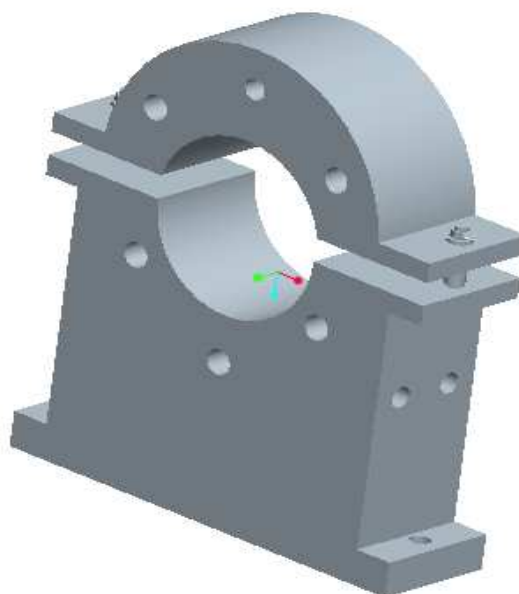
The fixture graphic model of ECM for chamber body inner cavity
